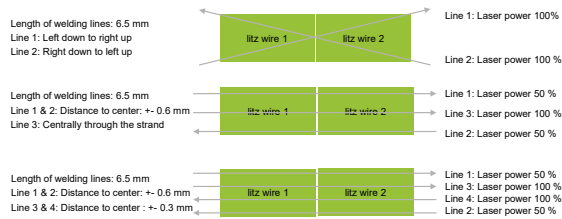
Possible variants for the welding geometry “several lines”
